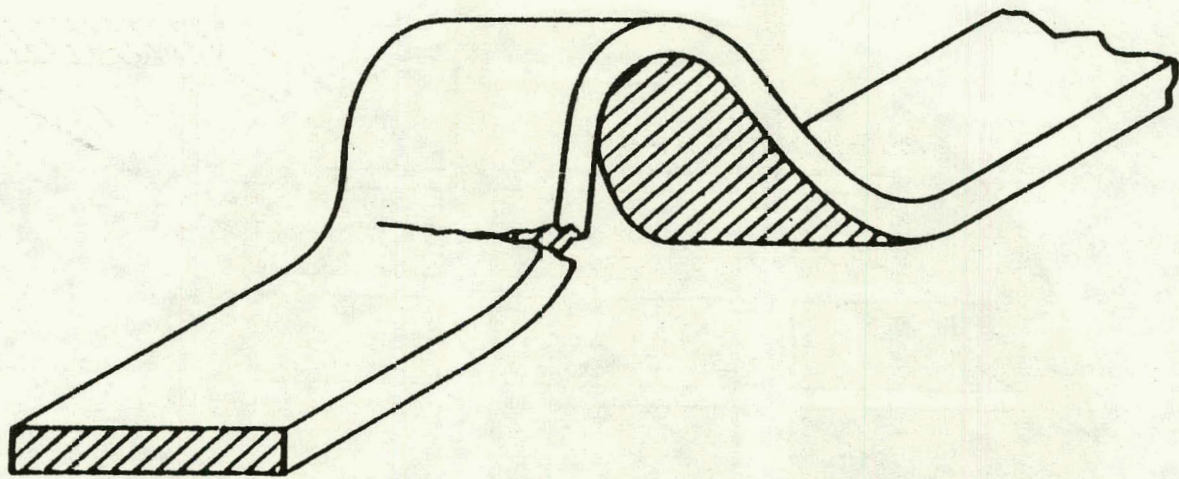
Solid Strip Interconnect Metal Fatigue Fracture. Reject.
